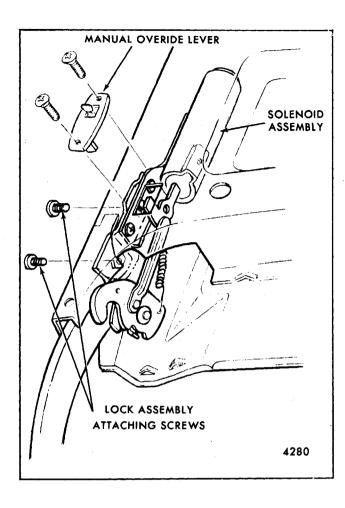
Front Seat Back Electrically Operated Lock - E Styles with Full Width Seat
